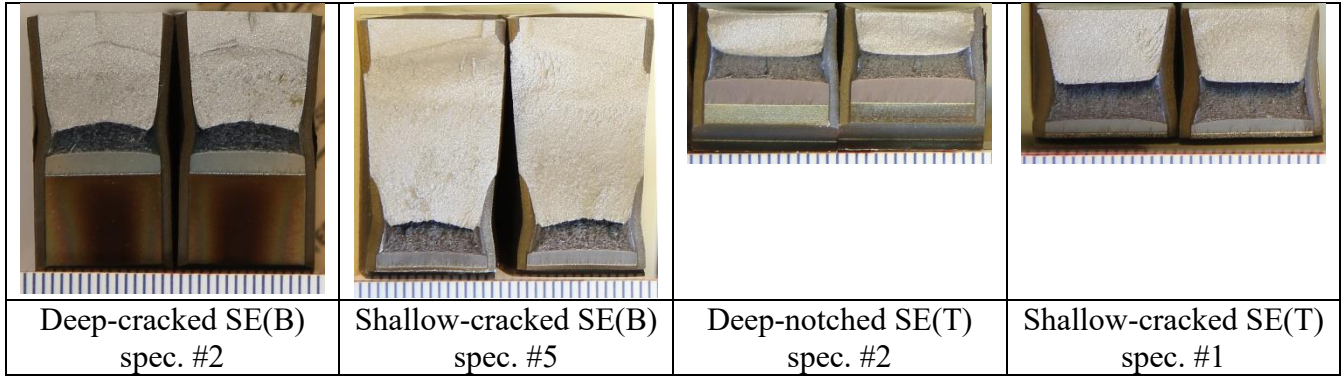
Typical fracture surfaces of tested fracture toughness samples.
